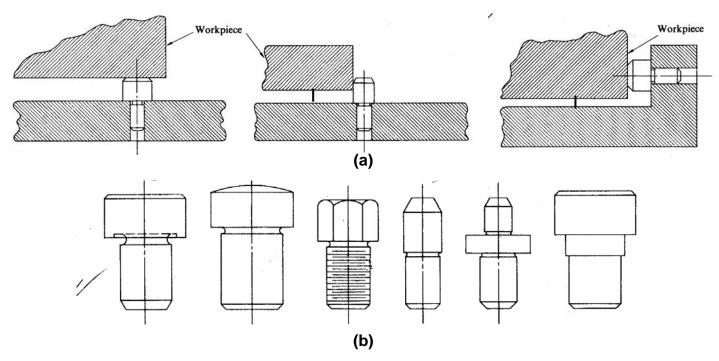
Locating by (a) flat surfaces and (b) types of pins used for that.
